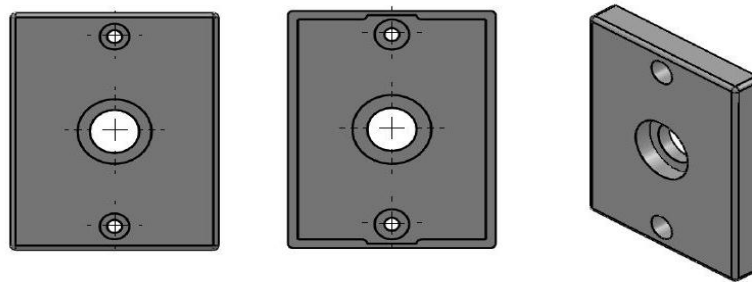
CAD MODEL OF THE WORK PIECE PATTERN
